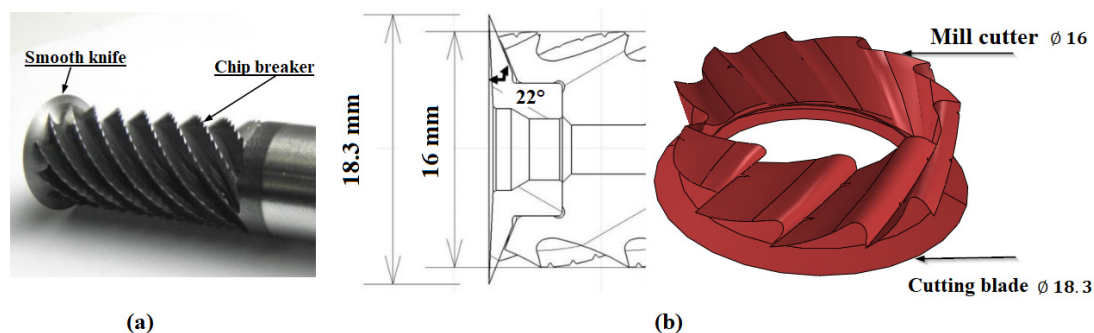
Components and design of the CZ10 cutting tool: (a) CZ10 used in the experiment [24]; (b) CZ10 derived by modeling and its geometric dimensions.
